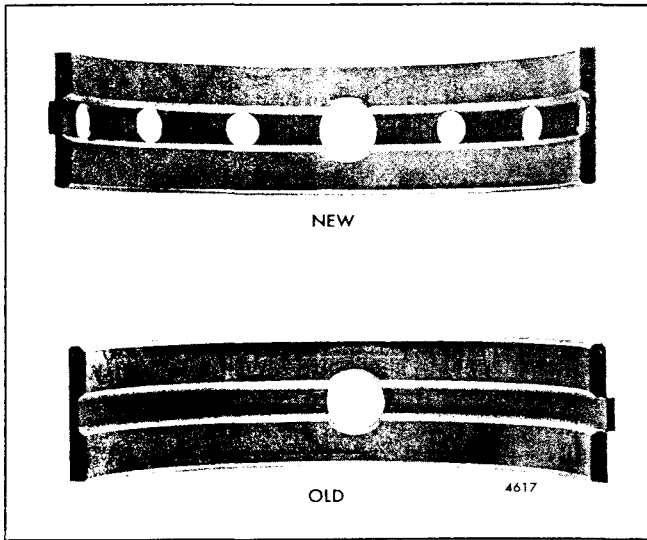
Old and New Upper Main Bearing Shells (V-Type Engines)
